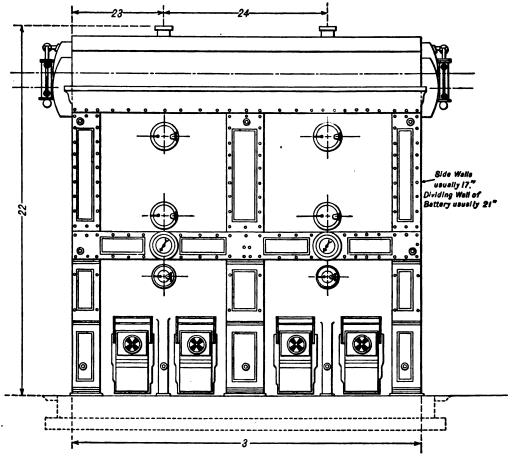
Dimensions of the Stirling Boiler. (See Table 16.)
